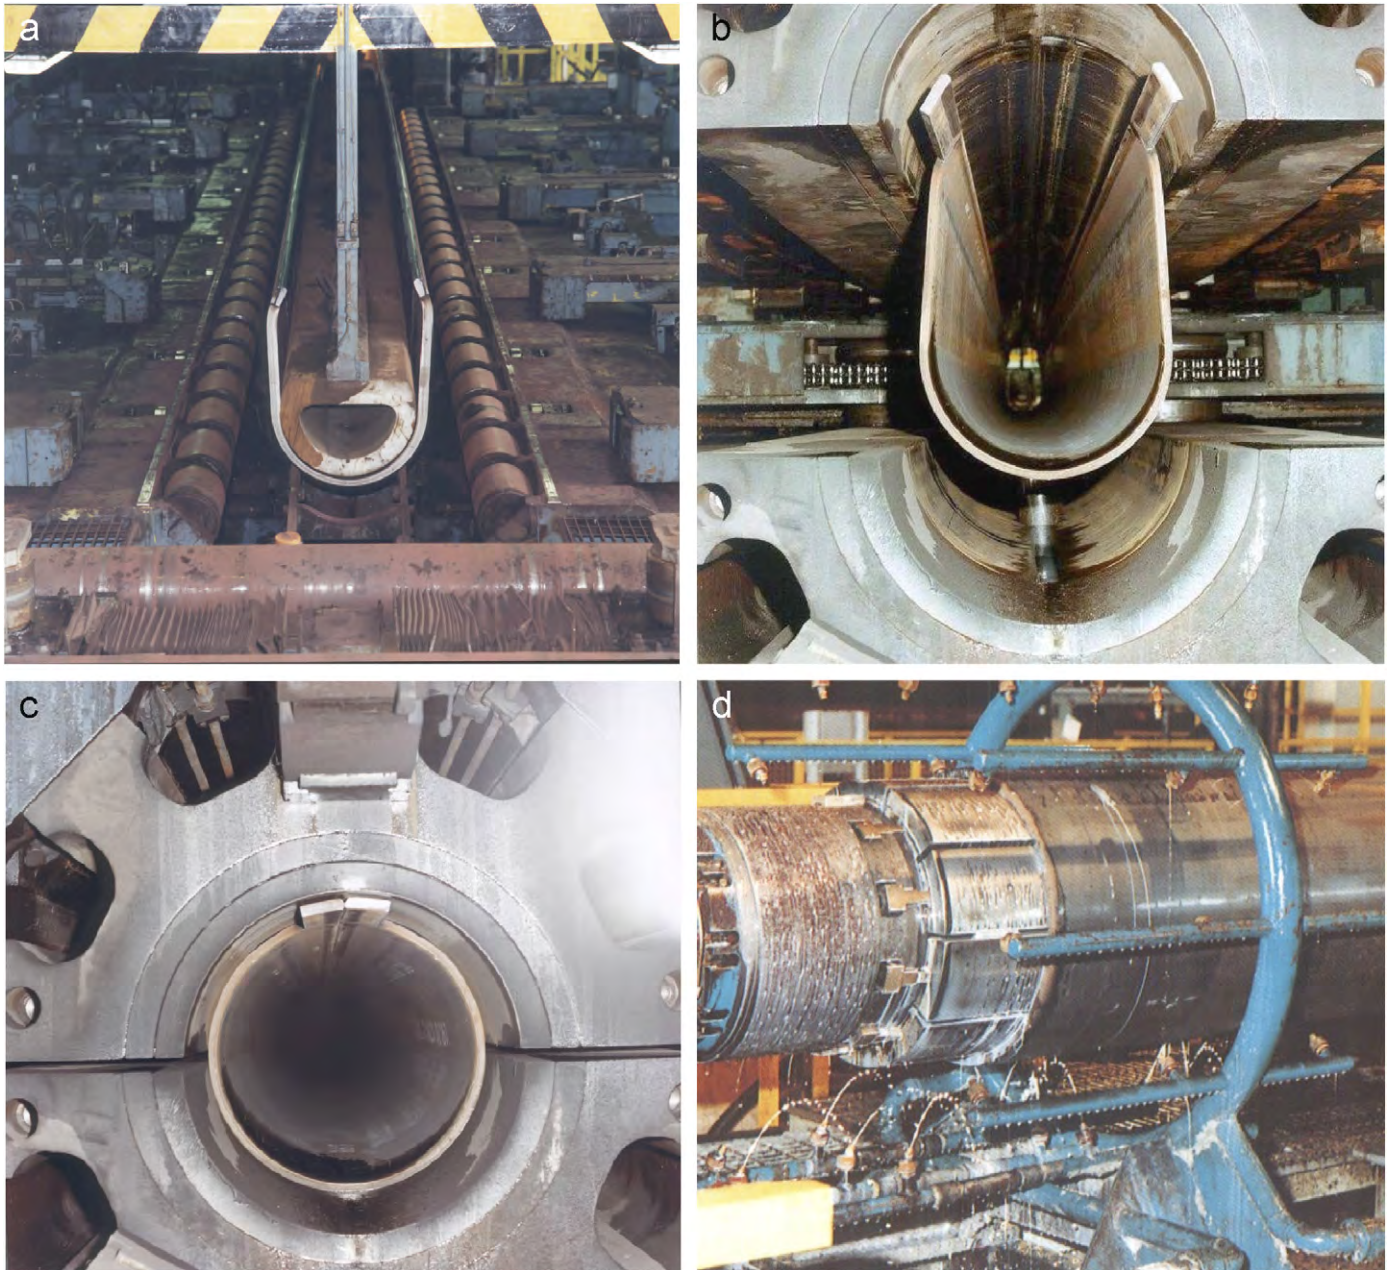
Photographs of (a) the U-press, (b) and (c) the O-press, and (d) the pipe expander. (Courtesy, Corus Tubes, UK).
